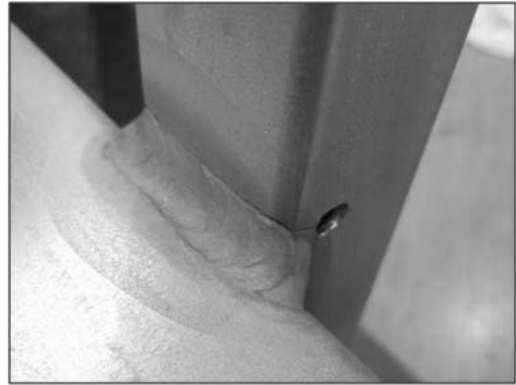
Stop hole drilled at the end of fatigue crack.
